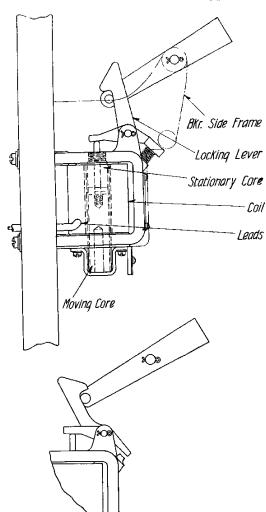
ELECTRIC LOCKOUT ATTACHMENT
